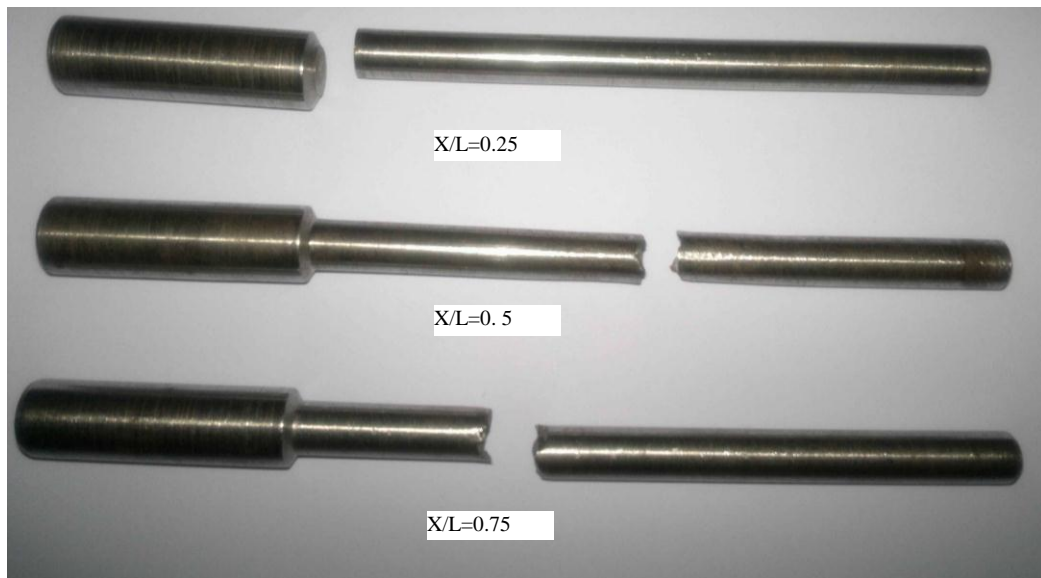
The fatigue failure of steel samples at different location of welding.
